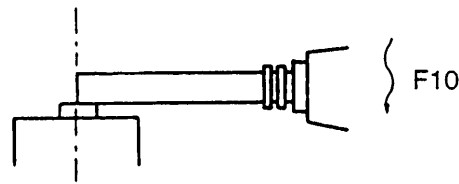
Slow Y-axis Approach to Touch Sensor
